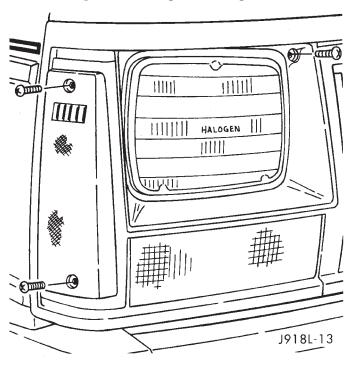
Headlamp Bezel & Side Marker Lamp—XJ Vehicles
